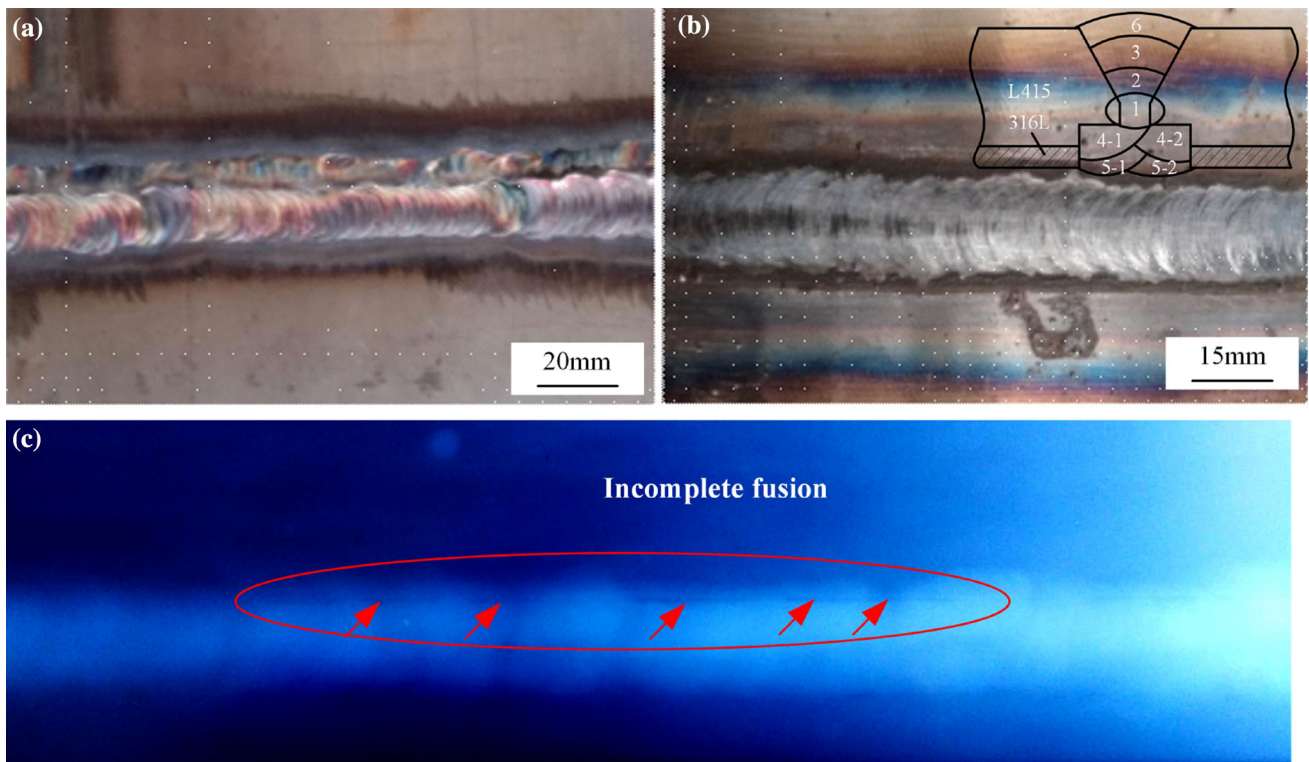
Results of groove B a macroscopic morphology of inner cap weld; b macroscopic morphology of outer cap weld; c RT result
